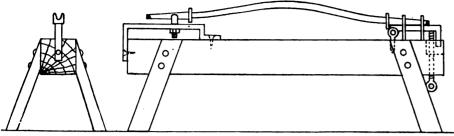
TOOL USED IN SHAPING GAFFS.
